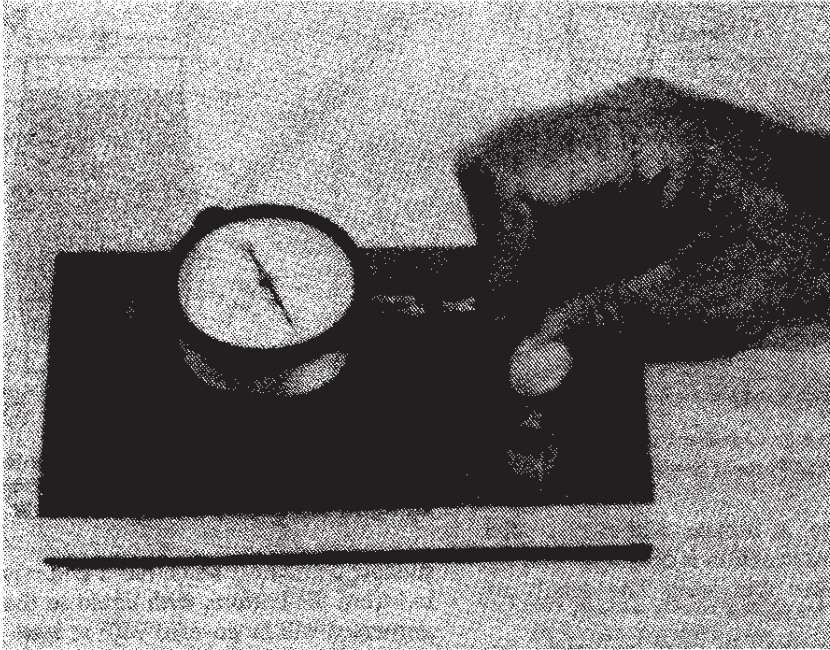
Lateral Expansion Gage for Charpy Impact Specimens
